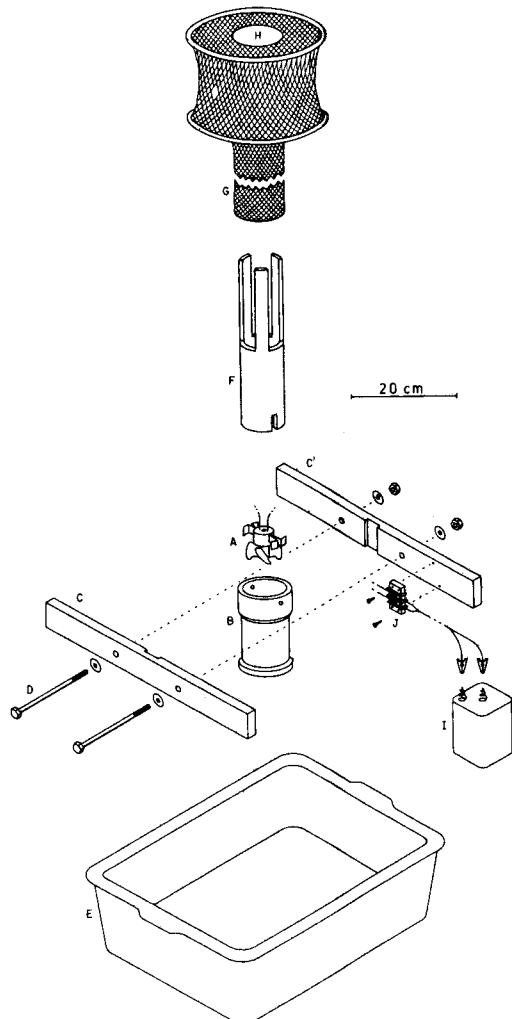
Diagram of trap for collecting gravid mosquitoes (A) Motor/fan assembly; (B) Inlet tube; (C) & (C') Crossbars; (D) Machine bolts; (E) Oviposition pan; (F) Chimney; (G) Collecting bag; (H) Reinforced support for bag; (I) 6v battery; (J) Connector block.
